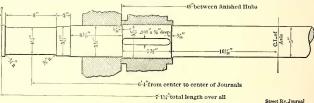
ELECTRIC RAILWAY AXLE FITTED FOR G E 73 C MOTOR
